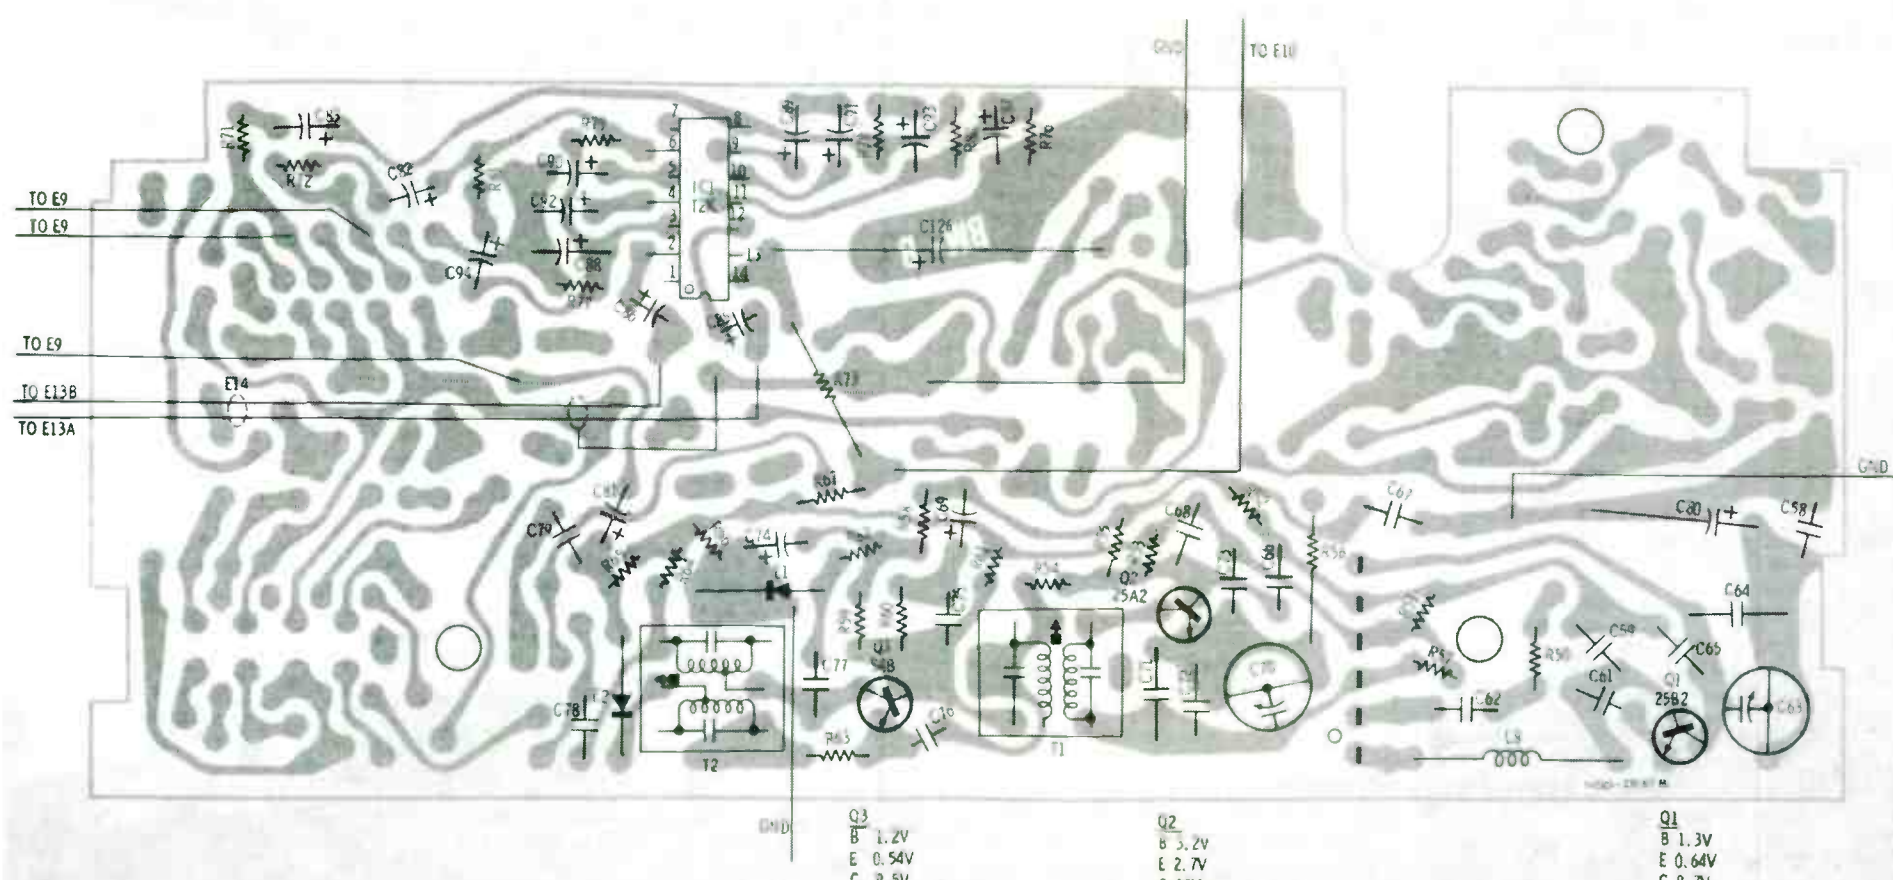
MOTOR REGULATOR PLATED BOARD DIAGRAM
